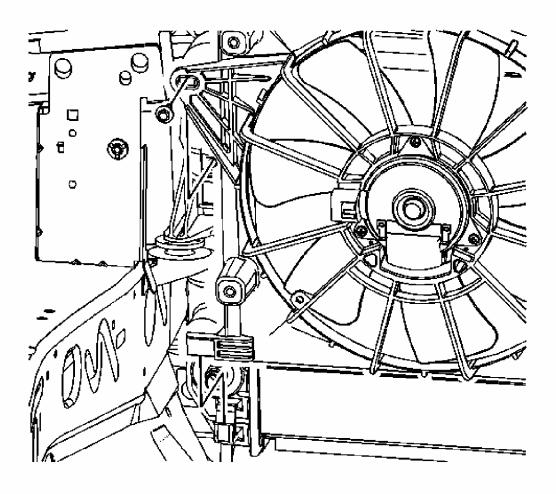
View Of Fan Shroud Mounting Bolts Courtesy of GENERAL MOTORS CORP.
